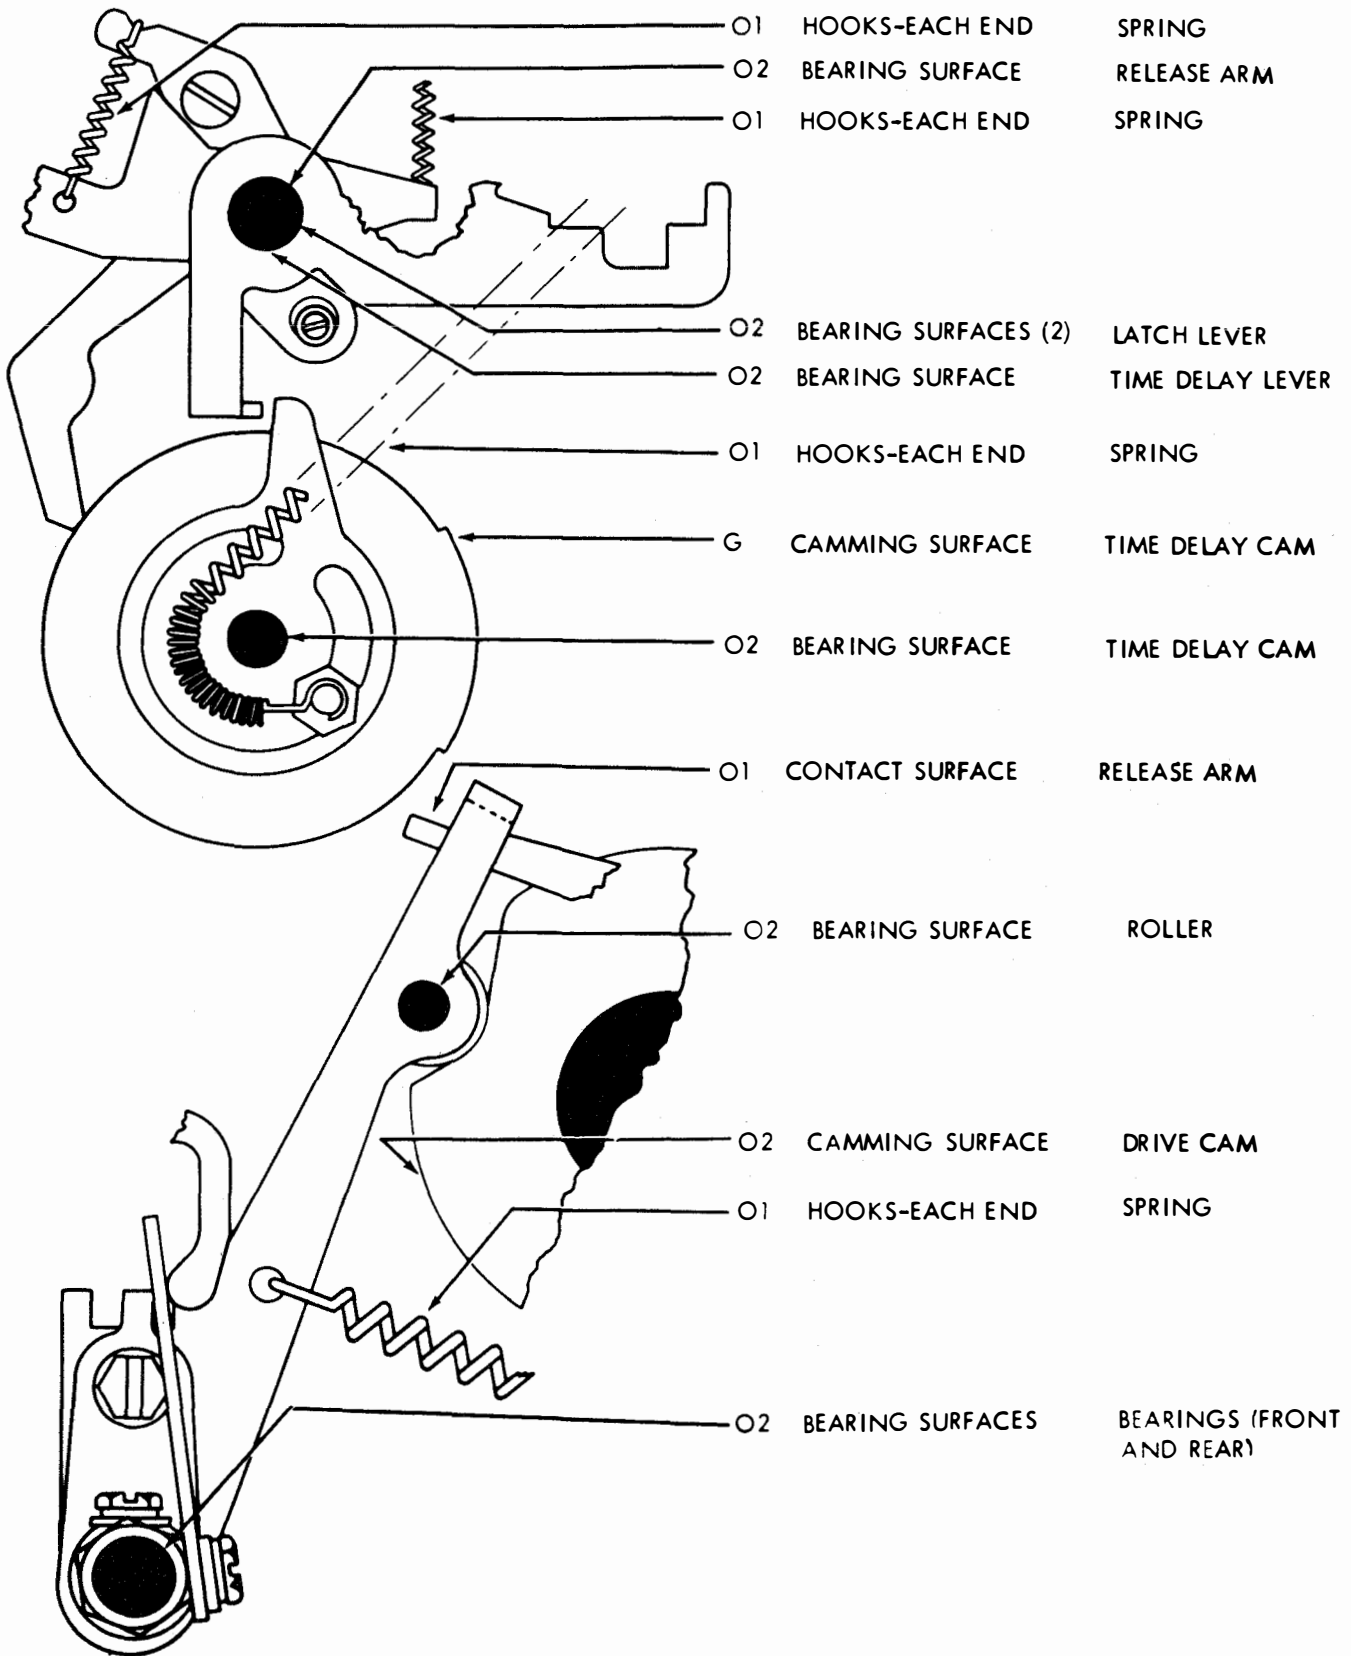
Automatic and Remote Control Noninterfering LTRS and BLANK Tape Feed-Out Mechanisms (Sheet 2 of 3)
